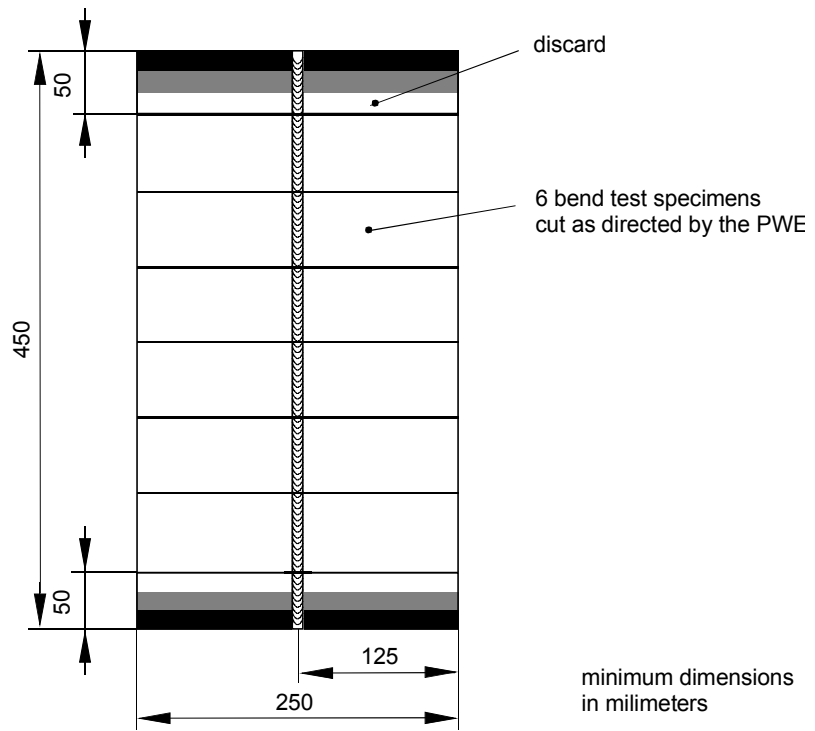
Test piece for a butt weld on sheet (for bend test specimens)
